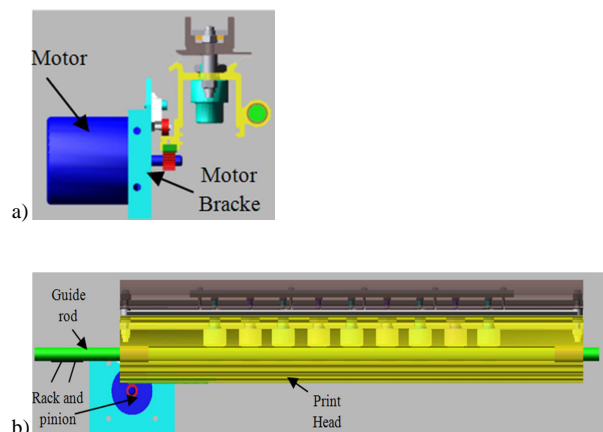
a) Side view and b) front view of CAD model of print head arrangement
